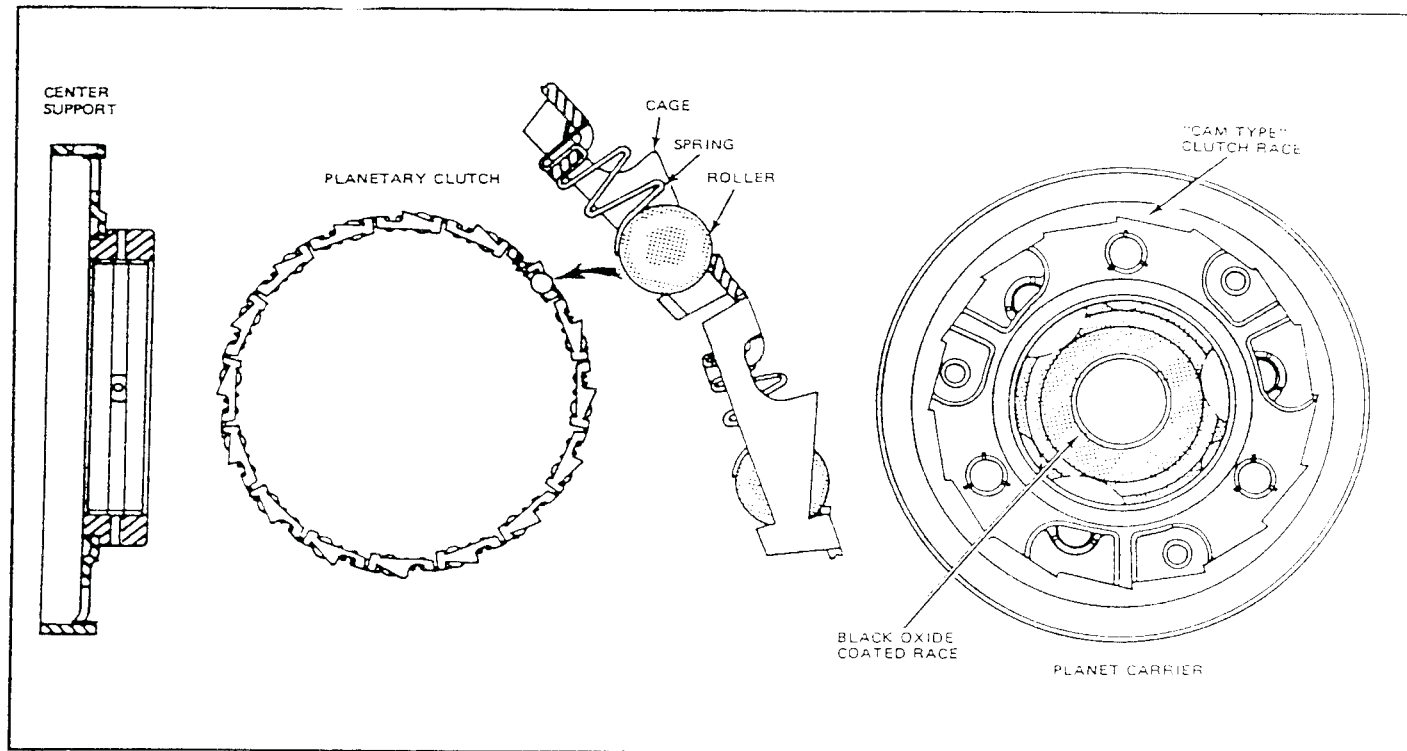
Roller Type Planetary Clutch, Carrier and Center Support—AOD
